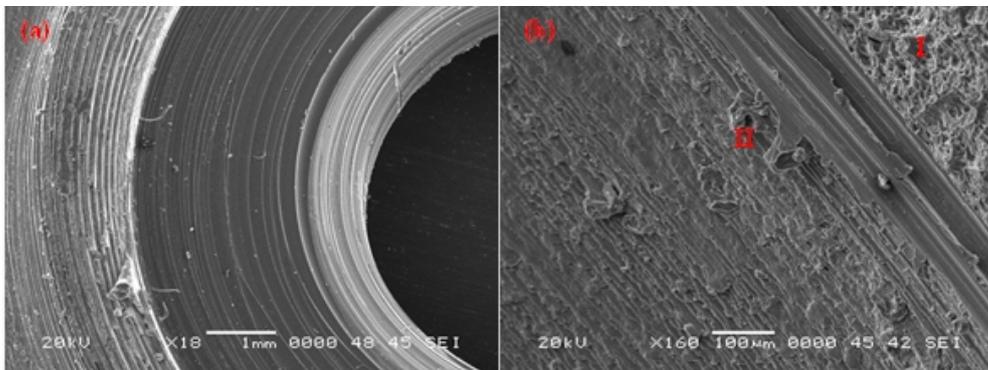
Failure surfaces along the weld nugget (a) conical pin weld (b) pinless weld (I- final ductile dimple failure and II-plasticized crack growth/propagation zone)
